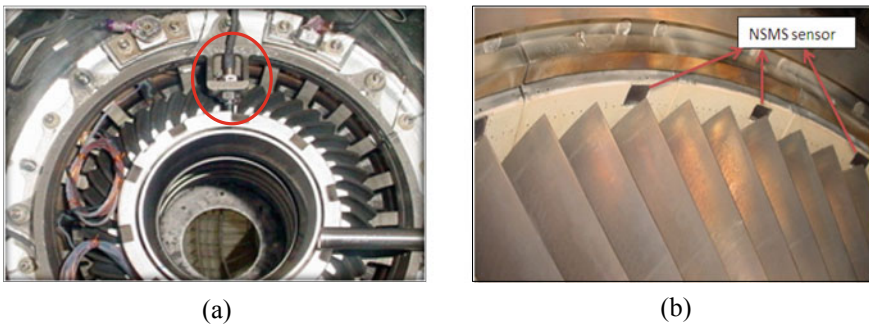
a 1/Rev sensor installed on engine b NSMS sensor installed on the Turbine casing
